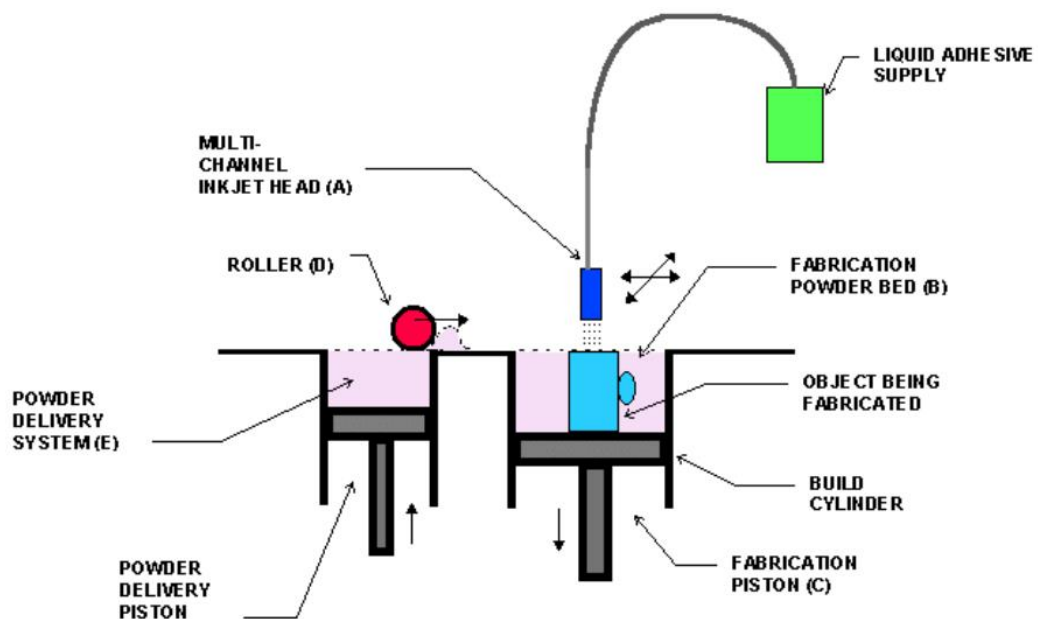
Three-dimensional printer 3DP (Aliakbari, 2012)
